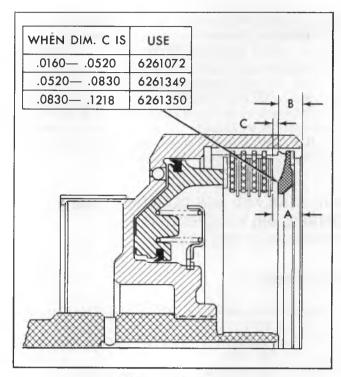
M--Determining Selective Fit for Forward Clutch Pressure Plate
